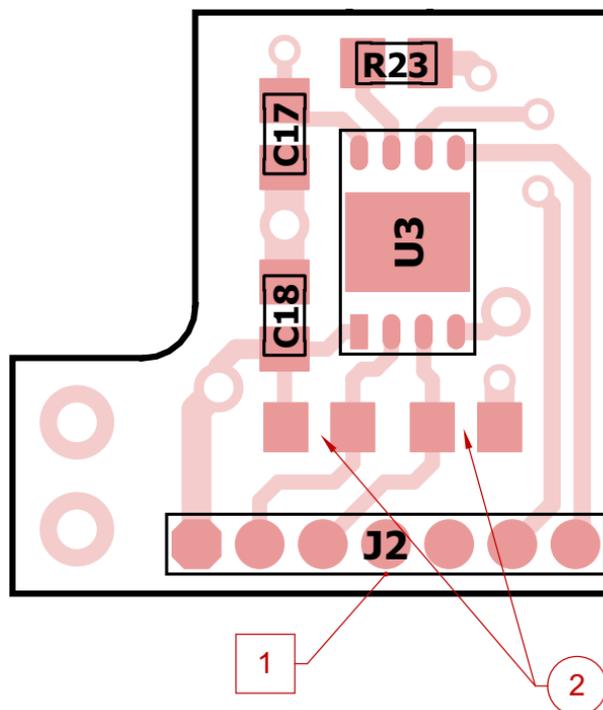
Motherboard Printed Circuit Assembly Bottom.
